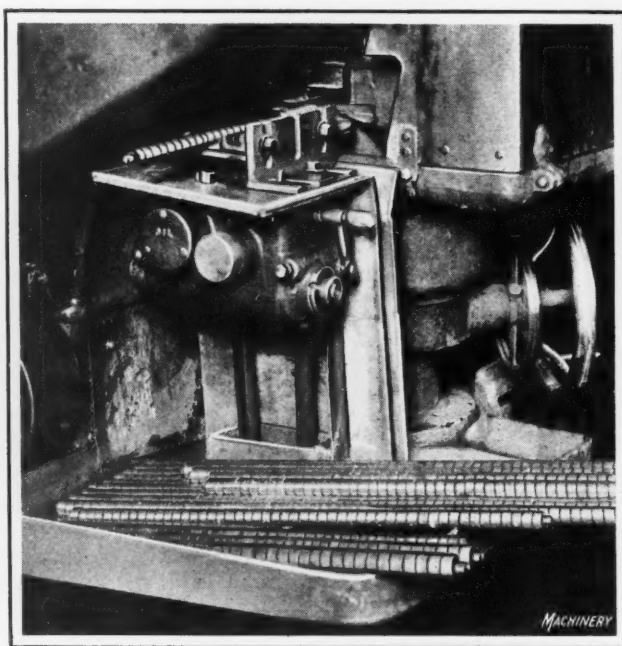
Grinding Rollers on a Centerless Grinding Machine
